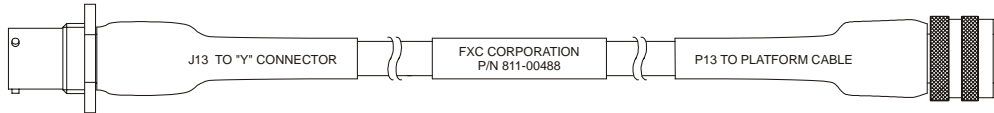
Cable, Extension, 4-Foot (C-5 and C-17)
